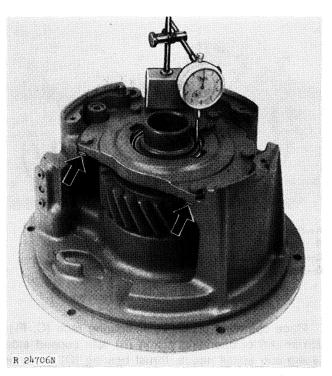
Checking Clutch Oil Pump Drive Gear End Play (Arrows Indicate Shims)
